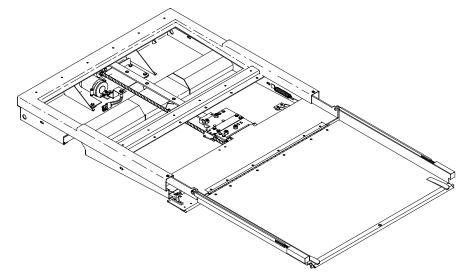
PF4000 RAMP ELECTRICAL WIRING SYSTEM
